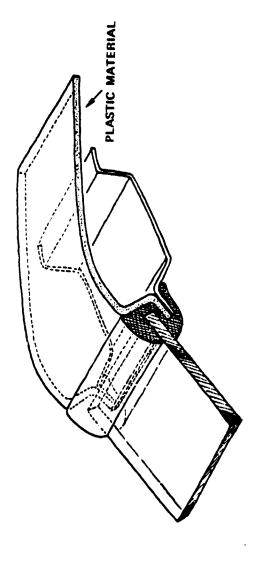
WINDSHIELD AND ROOF LONGITUDINAL SECTION
